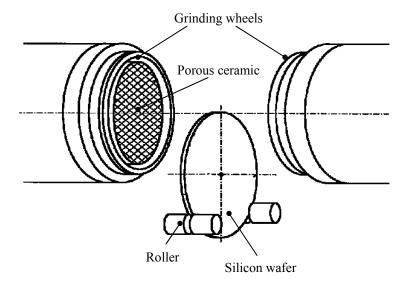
Support system using porous ceramics as hydro-pad fixture (after [67]).
